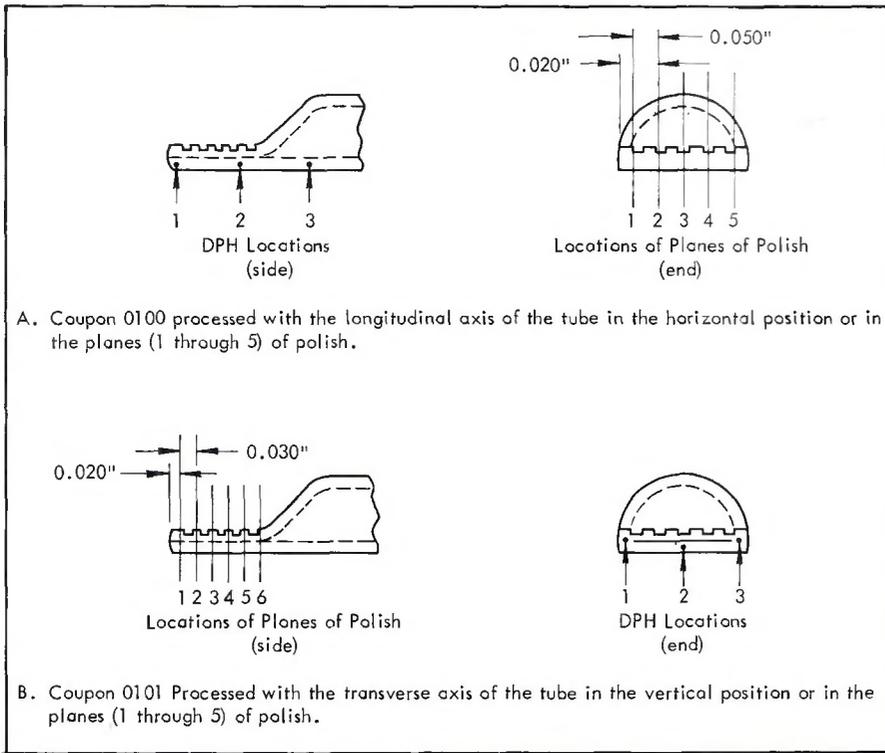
Locations of planes of polish and diamond pyramid hardness reading locations for crimp welds in aluminum tubes
